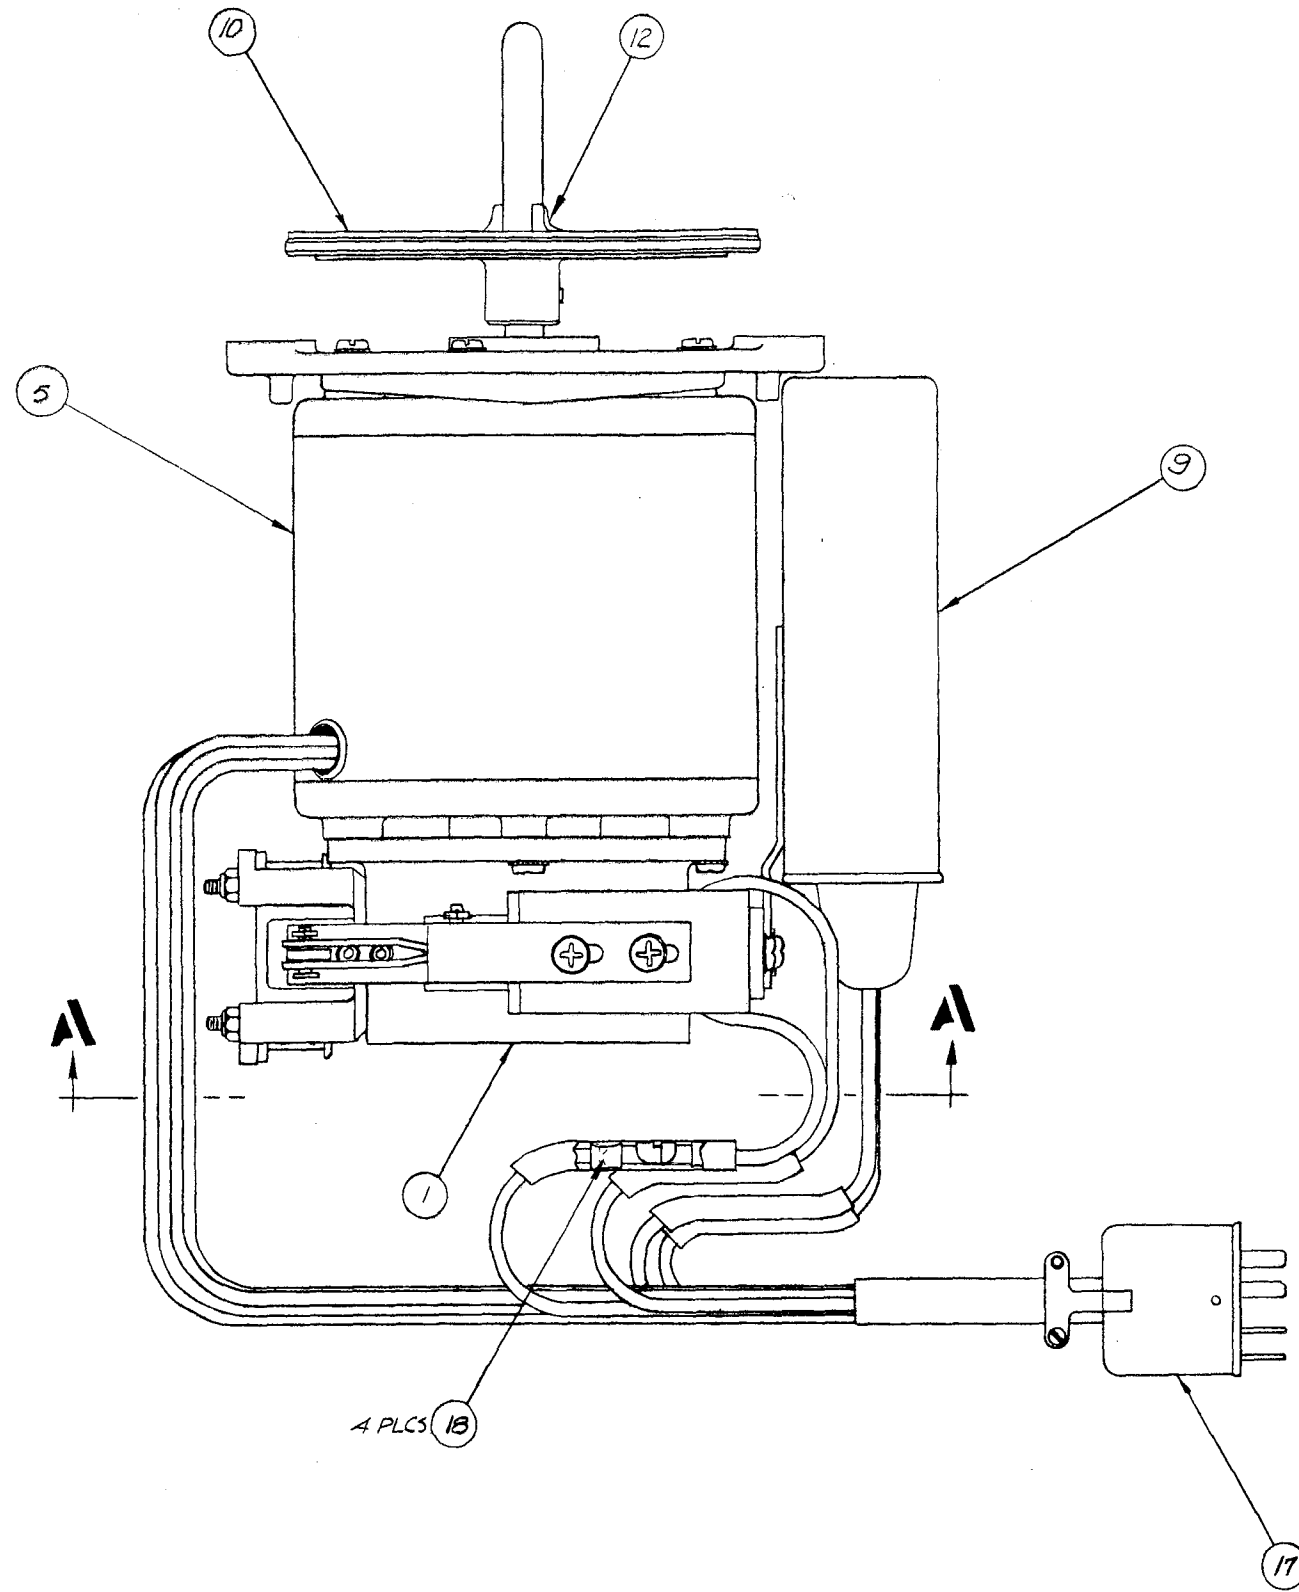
Typical Reel Drive Assembly (Rewind)
